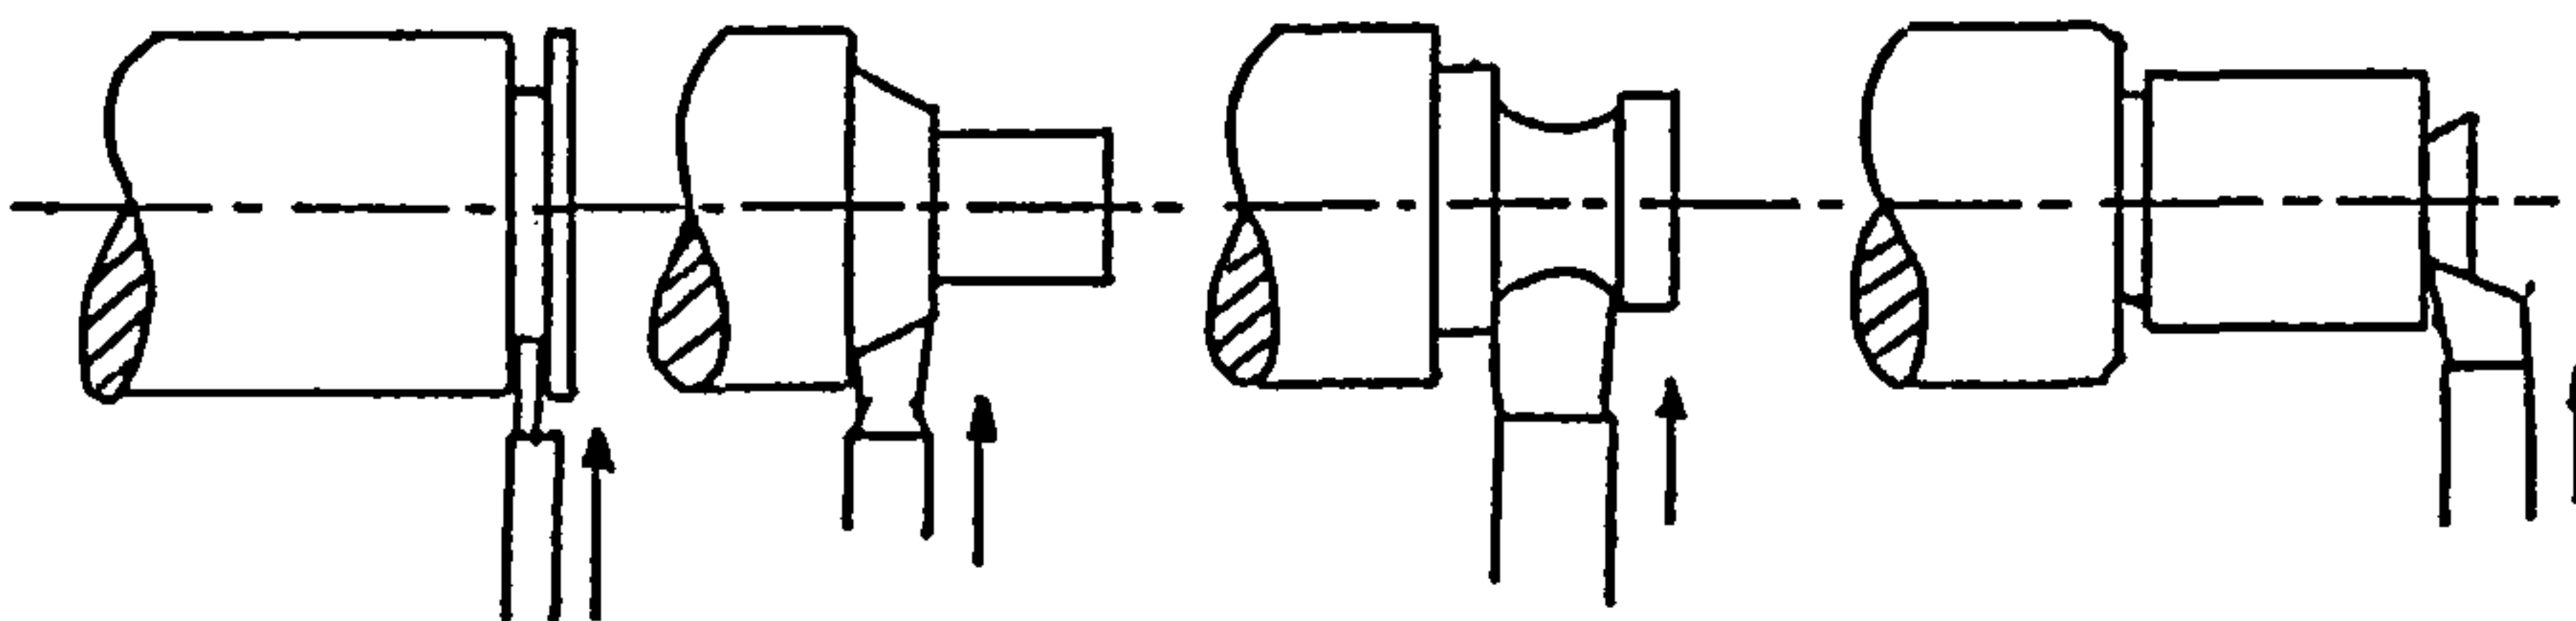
Typical workpiece surfaces produced by in-feeding.
